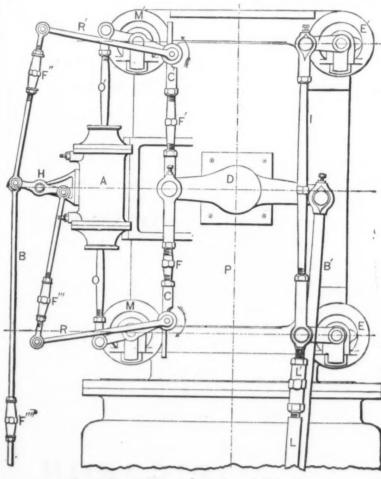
The High-Presoure, Cylinder and Valve Gear.
